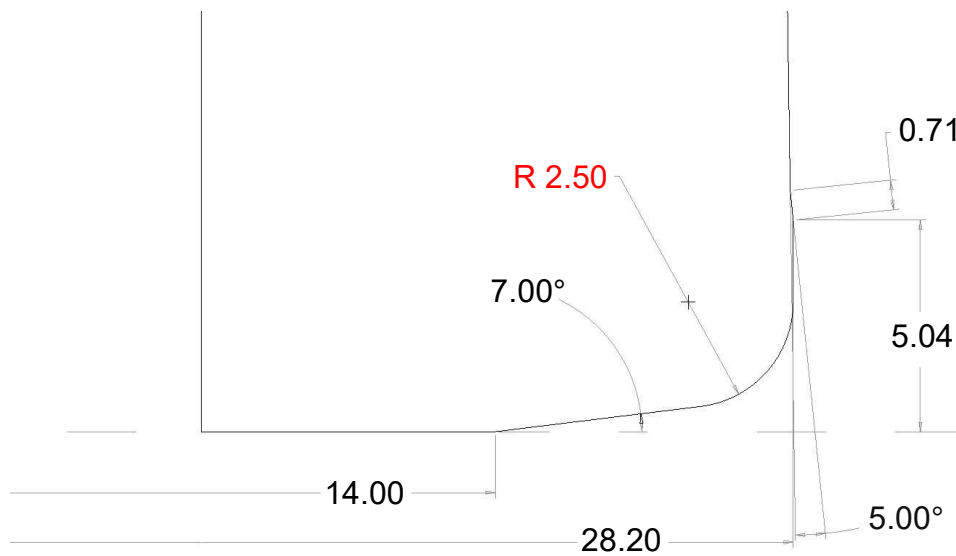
Creo Parametric sketch of the forming punch fillet radius in Bulk metal forming
